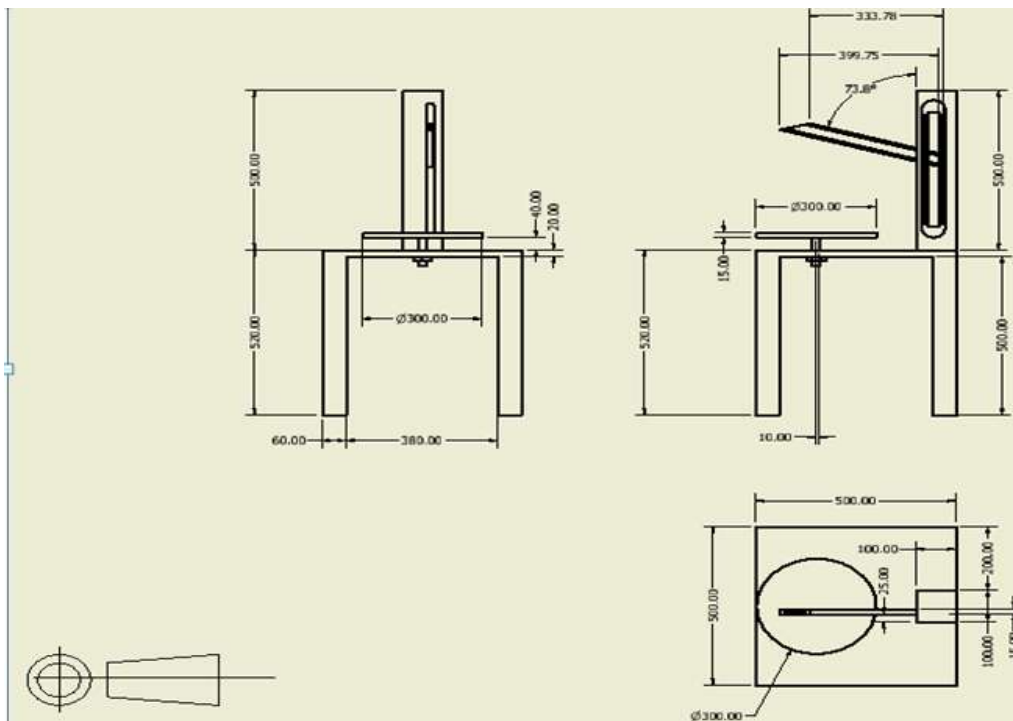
Engineering drawing of the designed static AOR device in third angle projection
